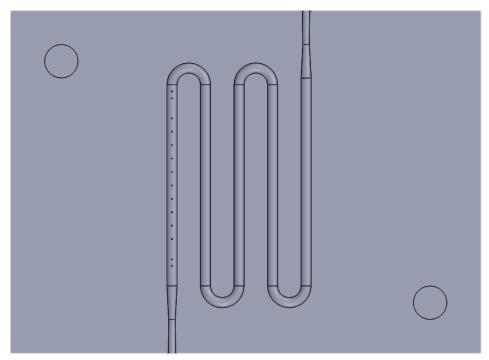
Bottom Plate with sensor holes and 22 gauge needle inlet and outlet
